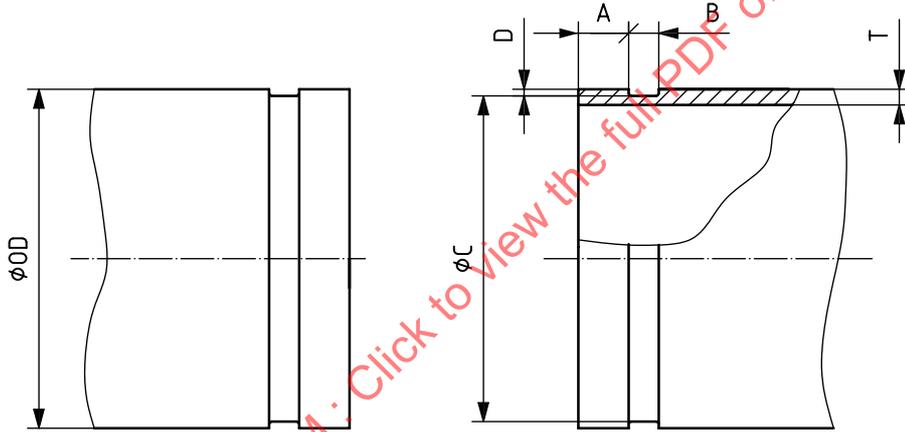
Cut grooved-end dimensional reference points from Table 2
